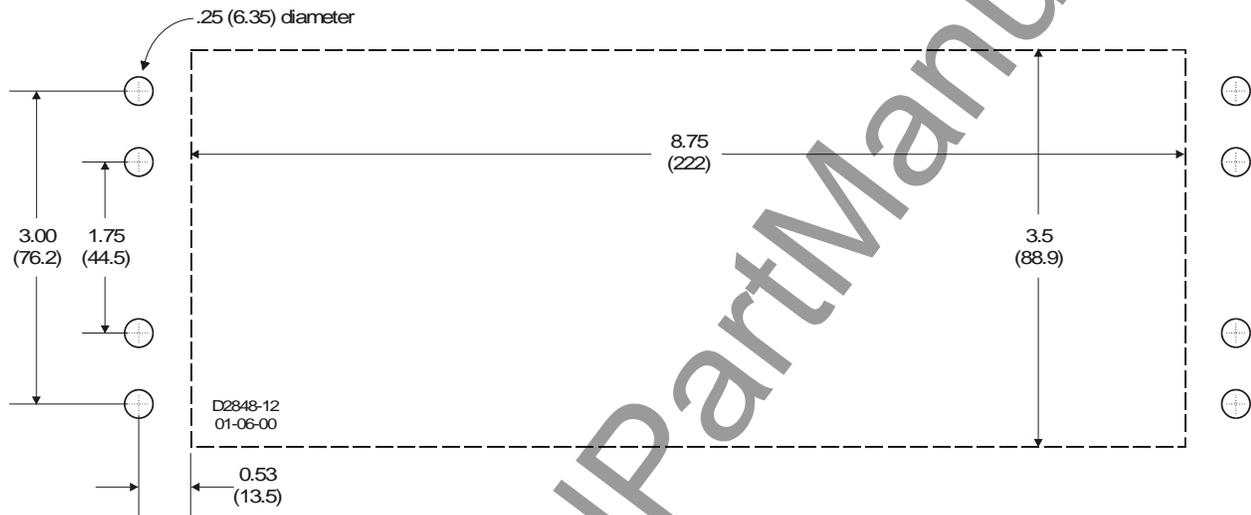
Single H1 Relay Mounting Dimensions for Panel Mounting without an Escutcheon Plate
